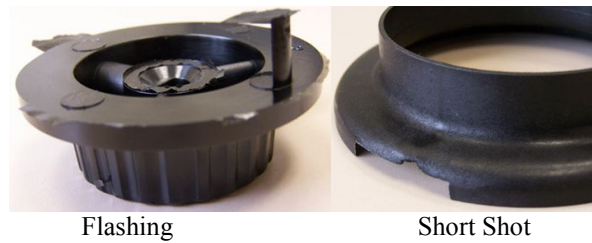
Examples of Two Cosmetic Defects – (1) Flashing and (2) Short Shot.
